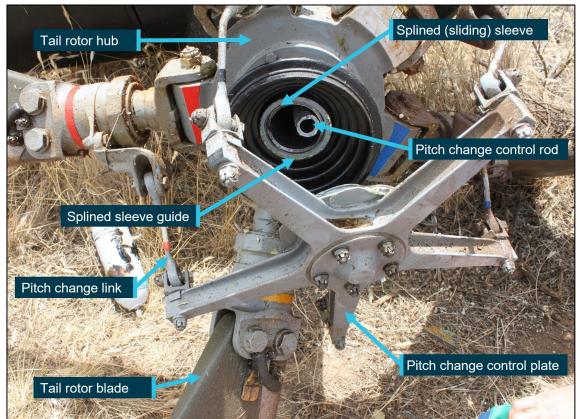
Tail rotor assembly with separation of pitch change control plate from gearbox
